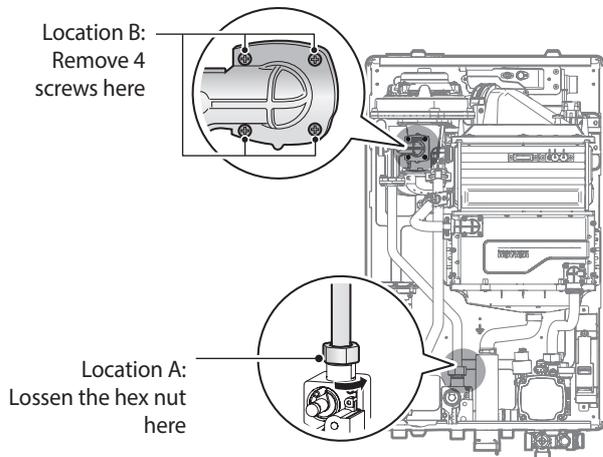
Detaching Gas Inlet Pipe from Gas Valve and Fan Motor Assembly (NCB-40LDWE, NCB-33LHWE)
